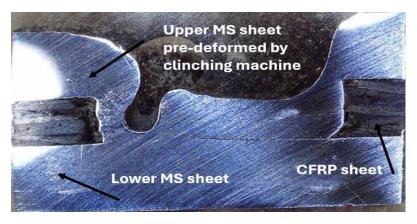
Joining of CFRP with MS by Resistance spot welding with weld time of 0.3 second
